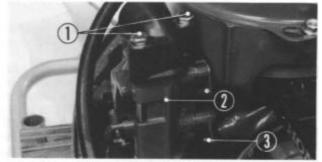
① 6 mm bolts ② Throttle rod ② Carburetor
